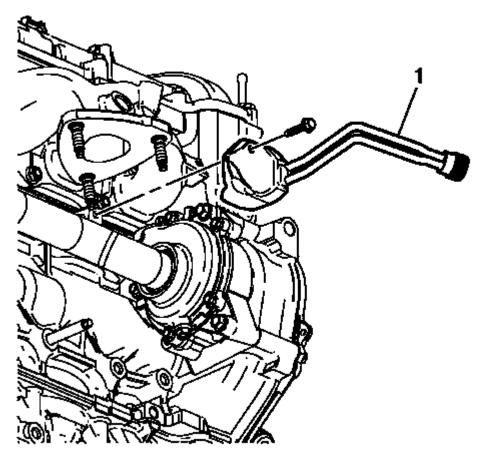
Block Heater Courtesy of GENERAL MOTORS COMPANY
